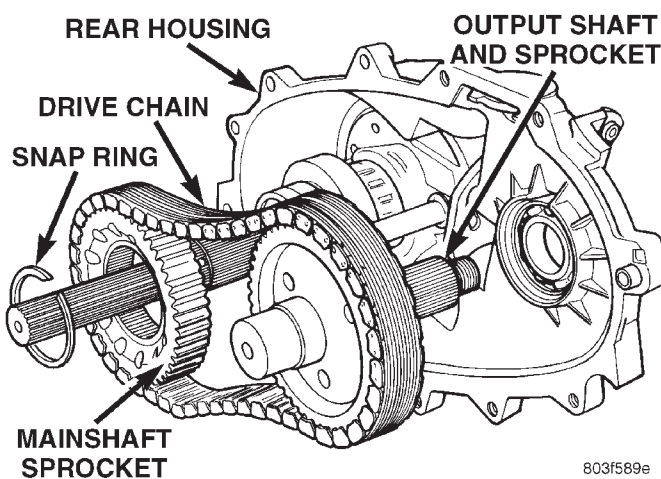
Front Output Shaft, Drive Gear And Chain Removal
